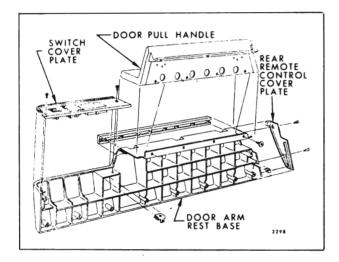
Door Arm Rest and Pull Handle - 49487 Style with Custom Trim Shown
